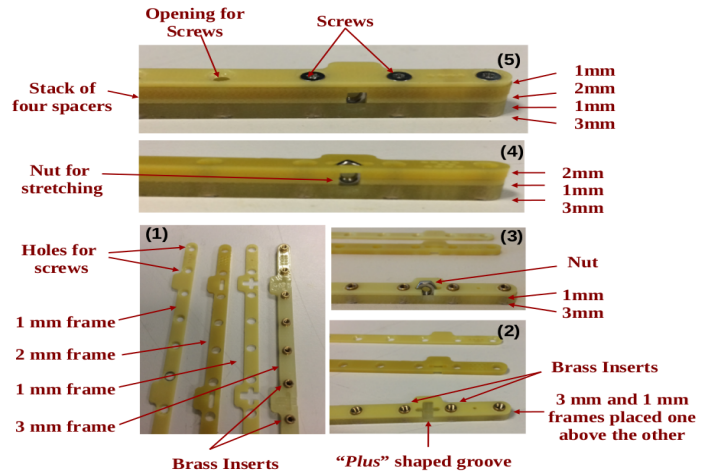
(1) Shapes and mechanical structure of 4 different frame pieces, (2) 3 mm and 1 mm frame pieces are combined together with "+" shaped groove reserved for stretching nut, (3) placement of nut after stacking two frame pieces, (4) 3 mm, 1 mm, and 2 mm frame pieces combined in a specific order and (5) different frame pieces stacked together to maintain the gap configuration of 3/1/2/1 mm as demanded by GE1/1 geometry, similar frame pieces are combined to form four layers around the periphery of the GEM stack as depicted in Figure 3.8 [17].
